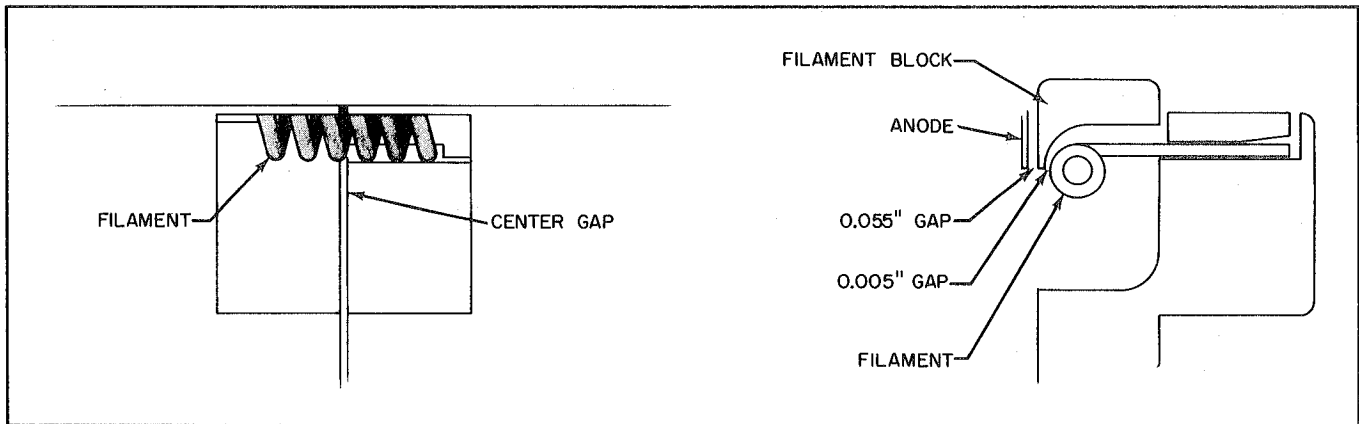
Cutaway Views Showing Properly Installed Filament.
